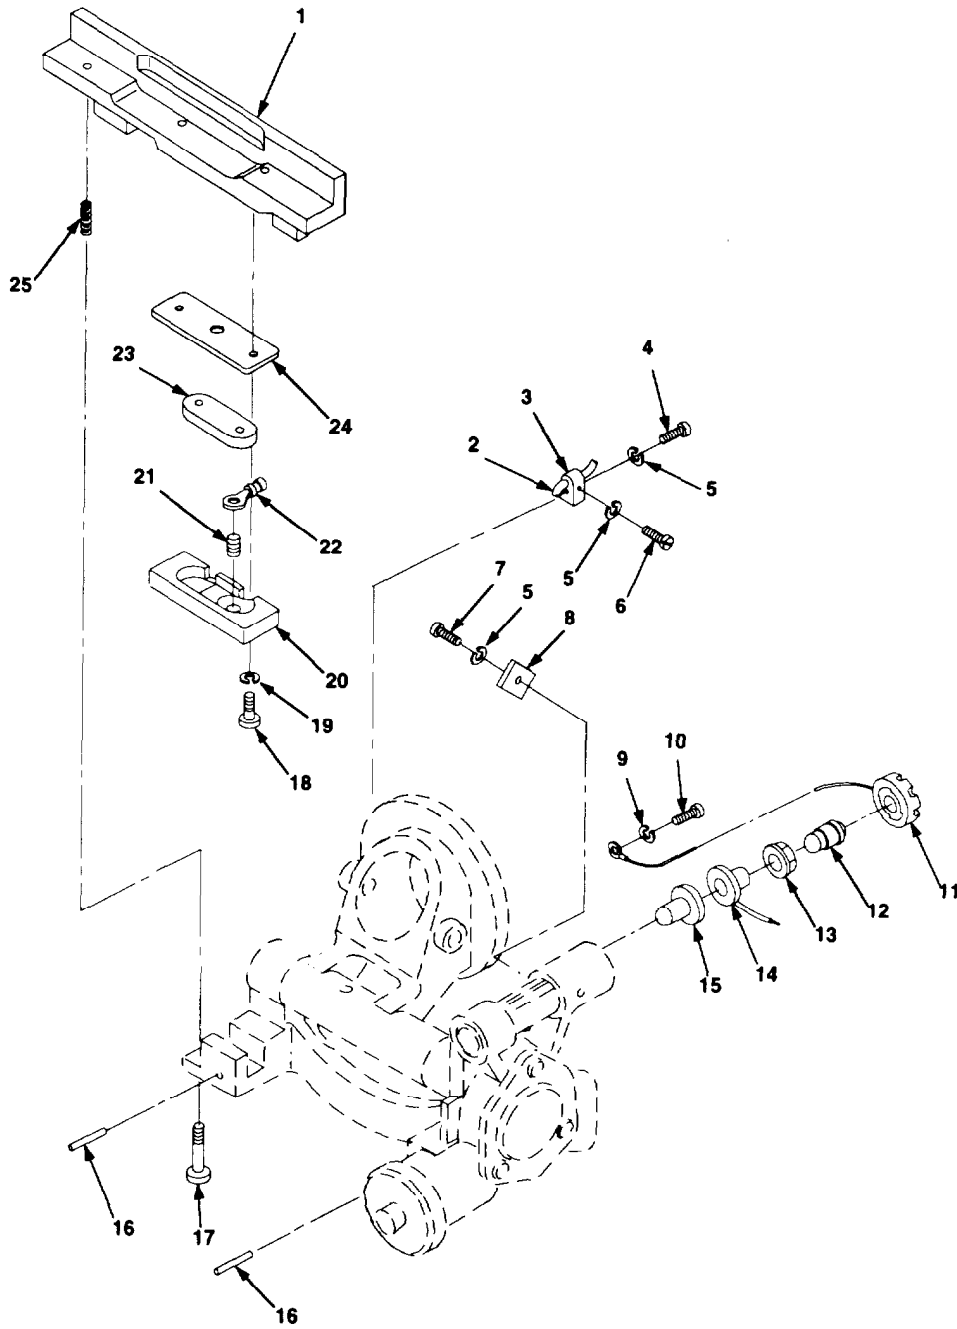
Quadrant Support Assembly 8267714-1 and 8267714-2
